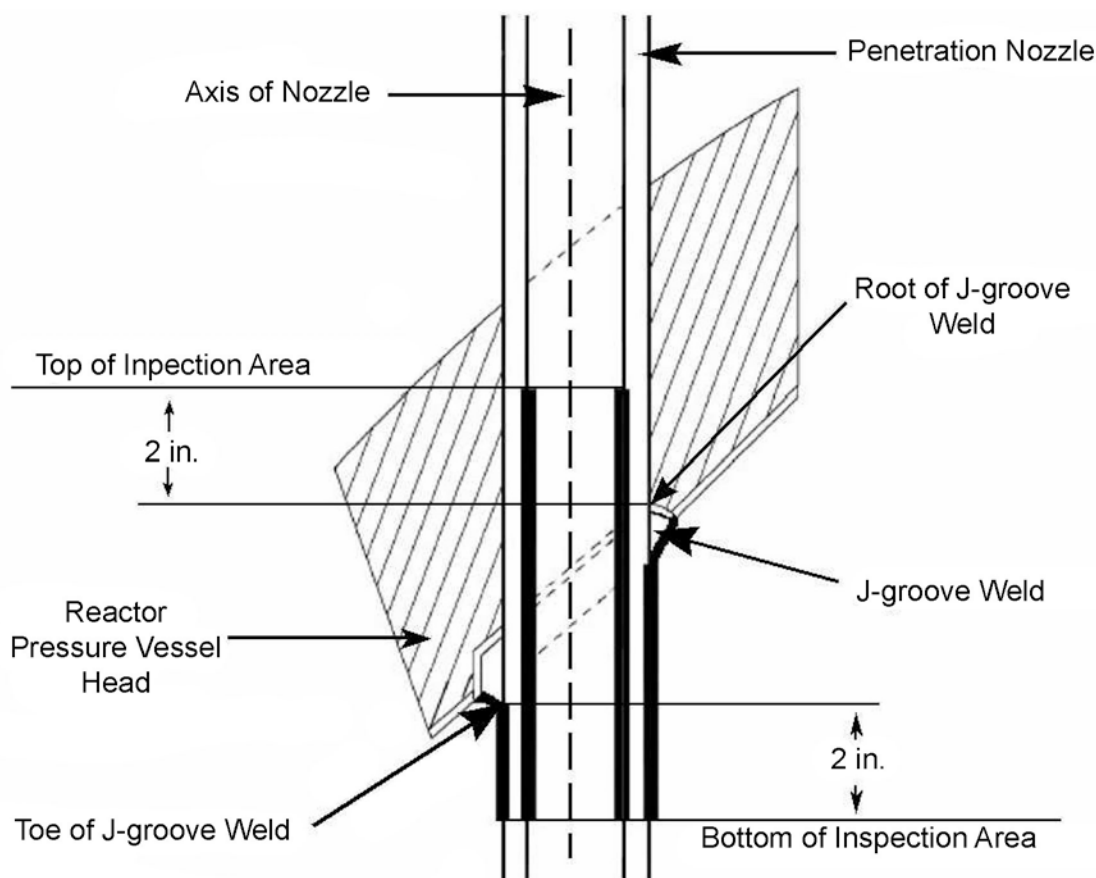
Wetted Surface Inspection Coverage Requirements in Accordance with NRC Order 003-009 Rev. 1. Note that the entire J weld and buttering surface are in the required inspection zone. Portions of the nozzle base metal on the inner diameter and outer diameter are also included, but these regions are not the subject of this report.
